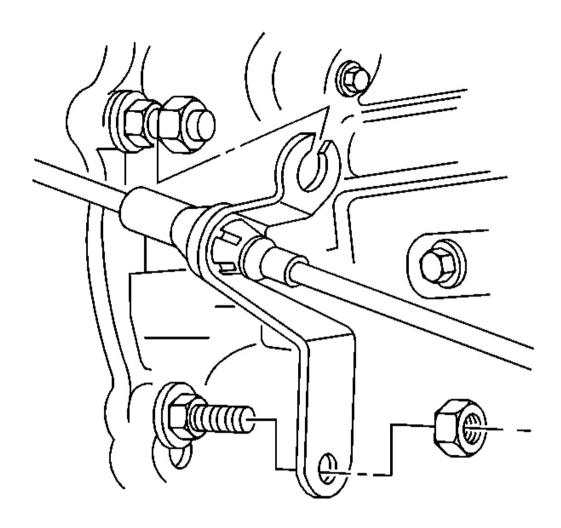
Shift Control Cable Bracket & Nuts Courtesy of GENERAL MOTORS CORP.
